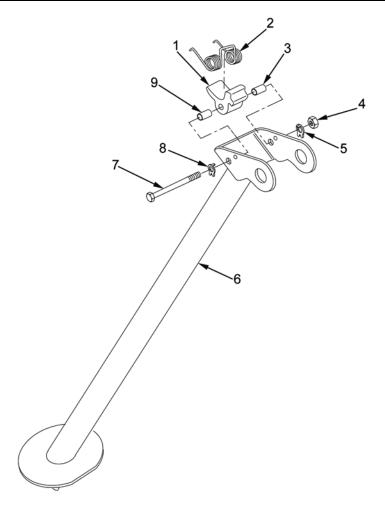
Disassembly/Assembly of Right Mortar Bipod Leg.
